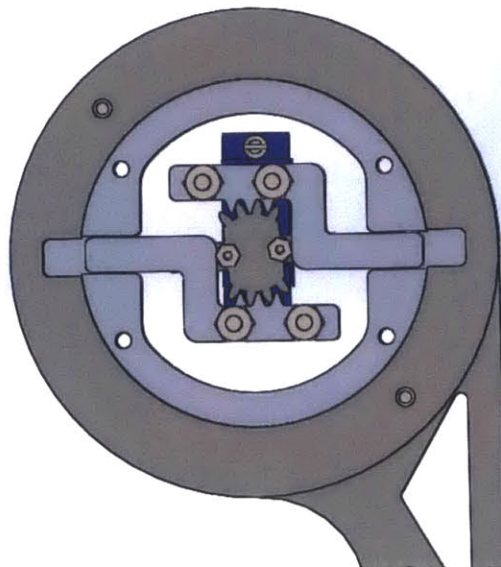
A simplified plan view of the mechanism, showing clearly the double rack and pinion.
